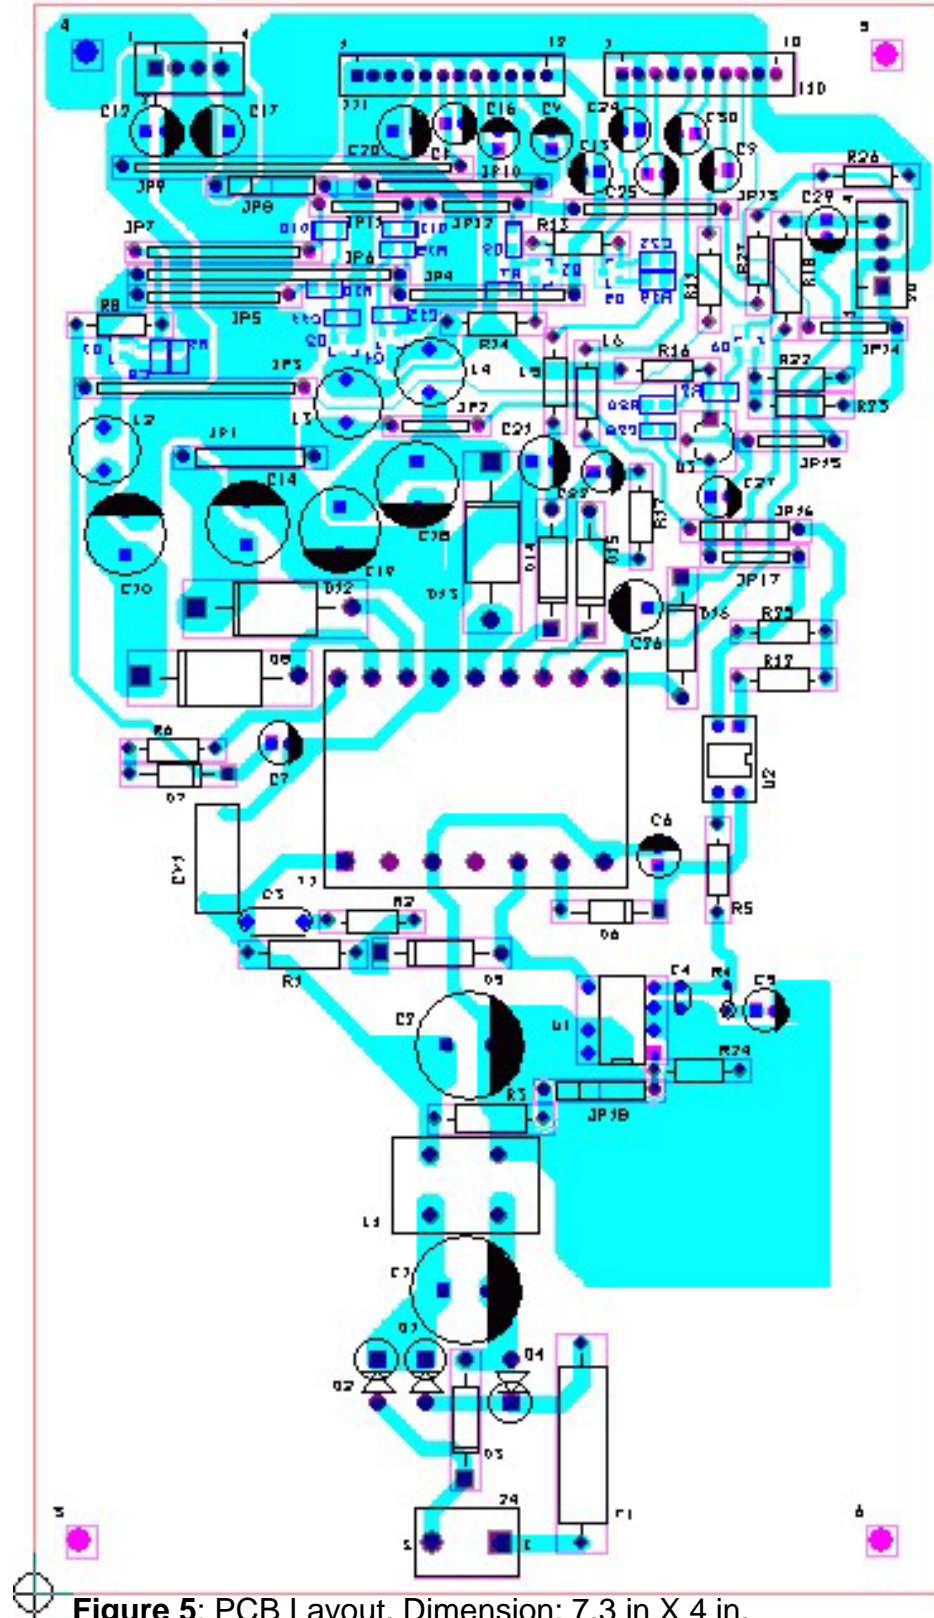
PCB Layout. Dimension: 7.3 in X 4 in.
